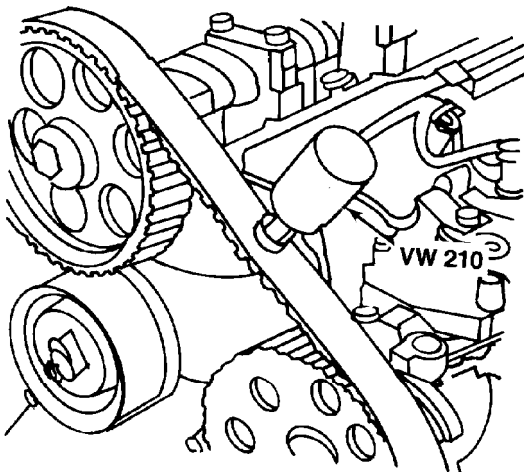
Setting Camshaft Timing Marks (Diesel)
